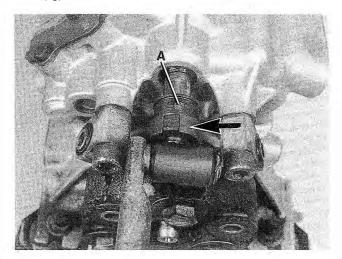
Shift rod bushing lockring (arrow), and pin (A). Transmission shown removed. With transmission installed, drive pin out from below.
